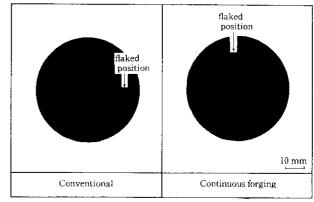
Macrostructure of test specimen after rolling-contact fatigue life test
